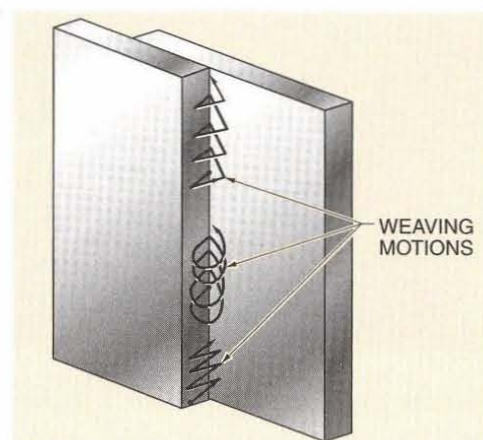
A figure eight, rotary, or crescent weaving motion is used with uphill welding to control the width of the weld bead.
